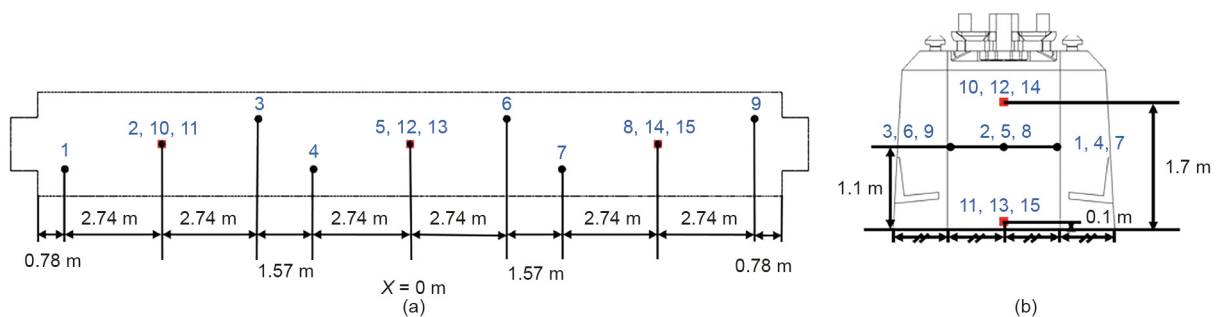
A dimensional drawing of the measurement points within the real-life railway car under testing. (a) Top view; (b) front view.
